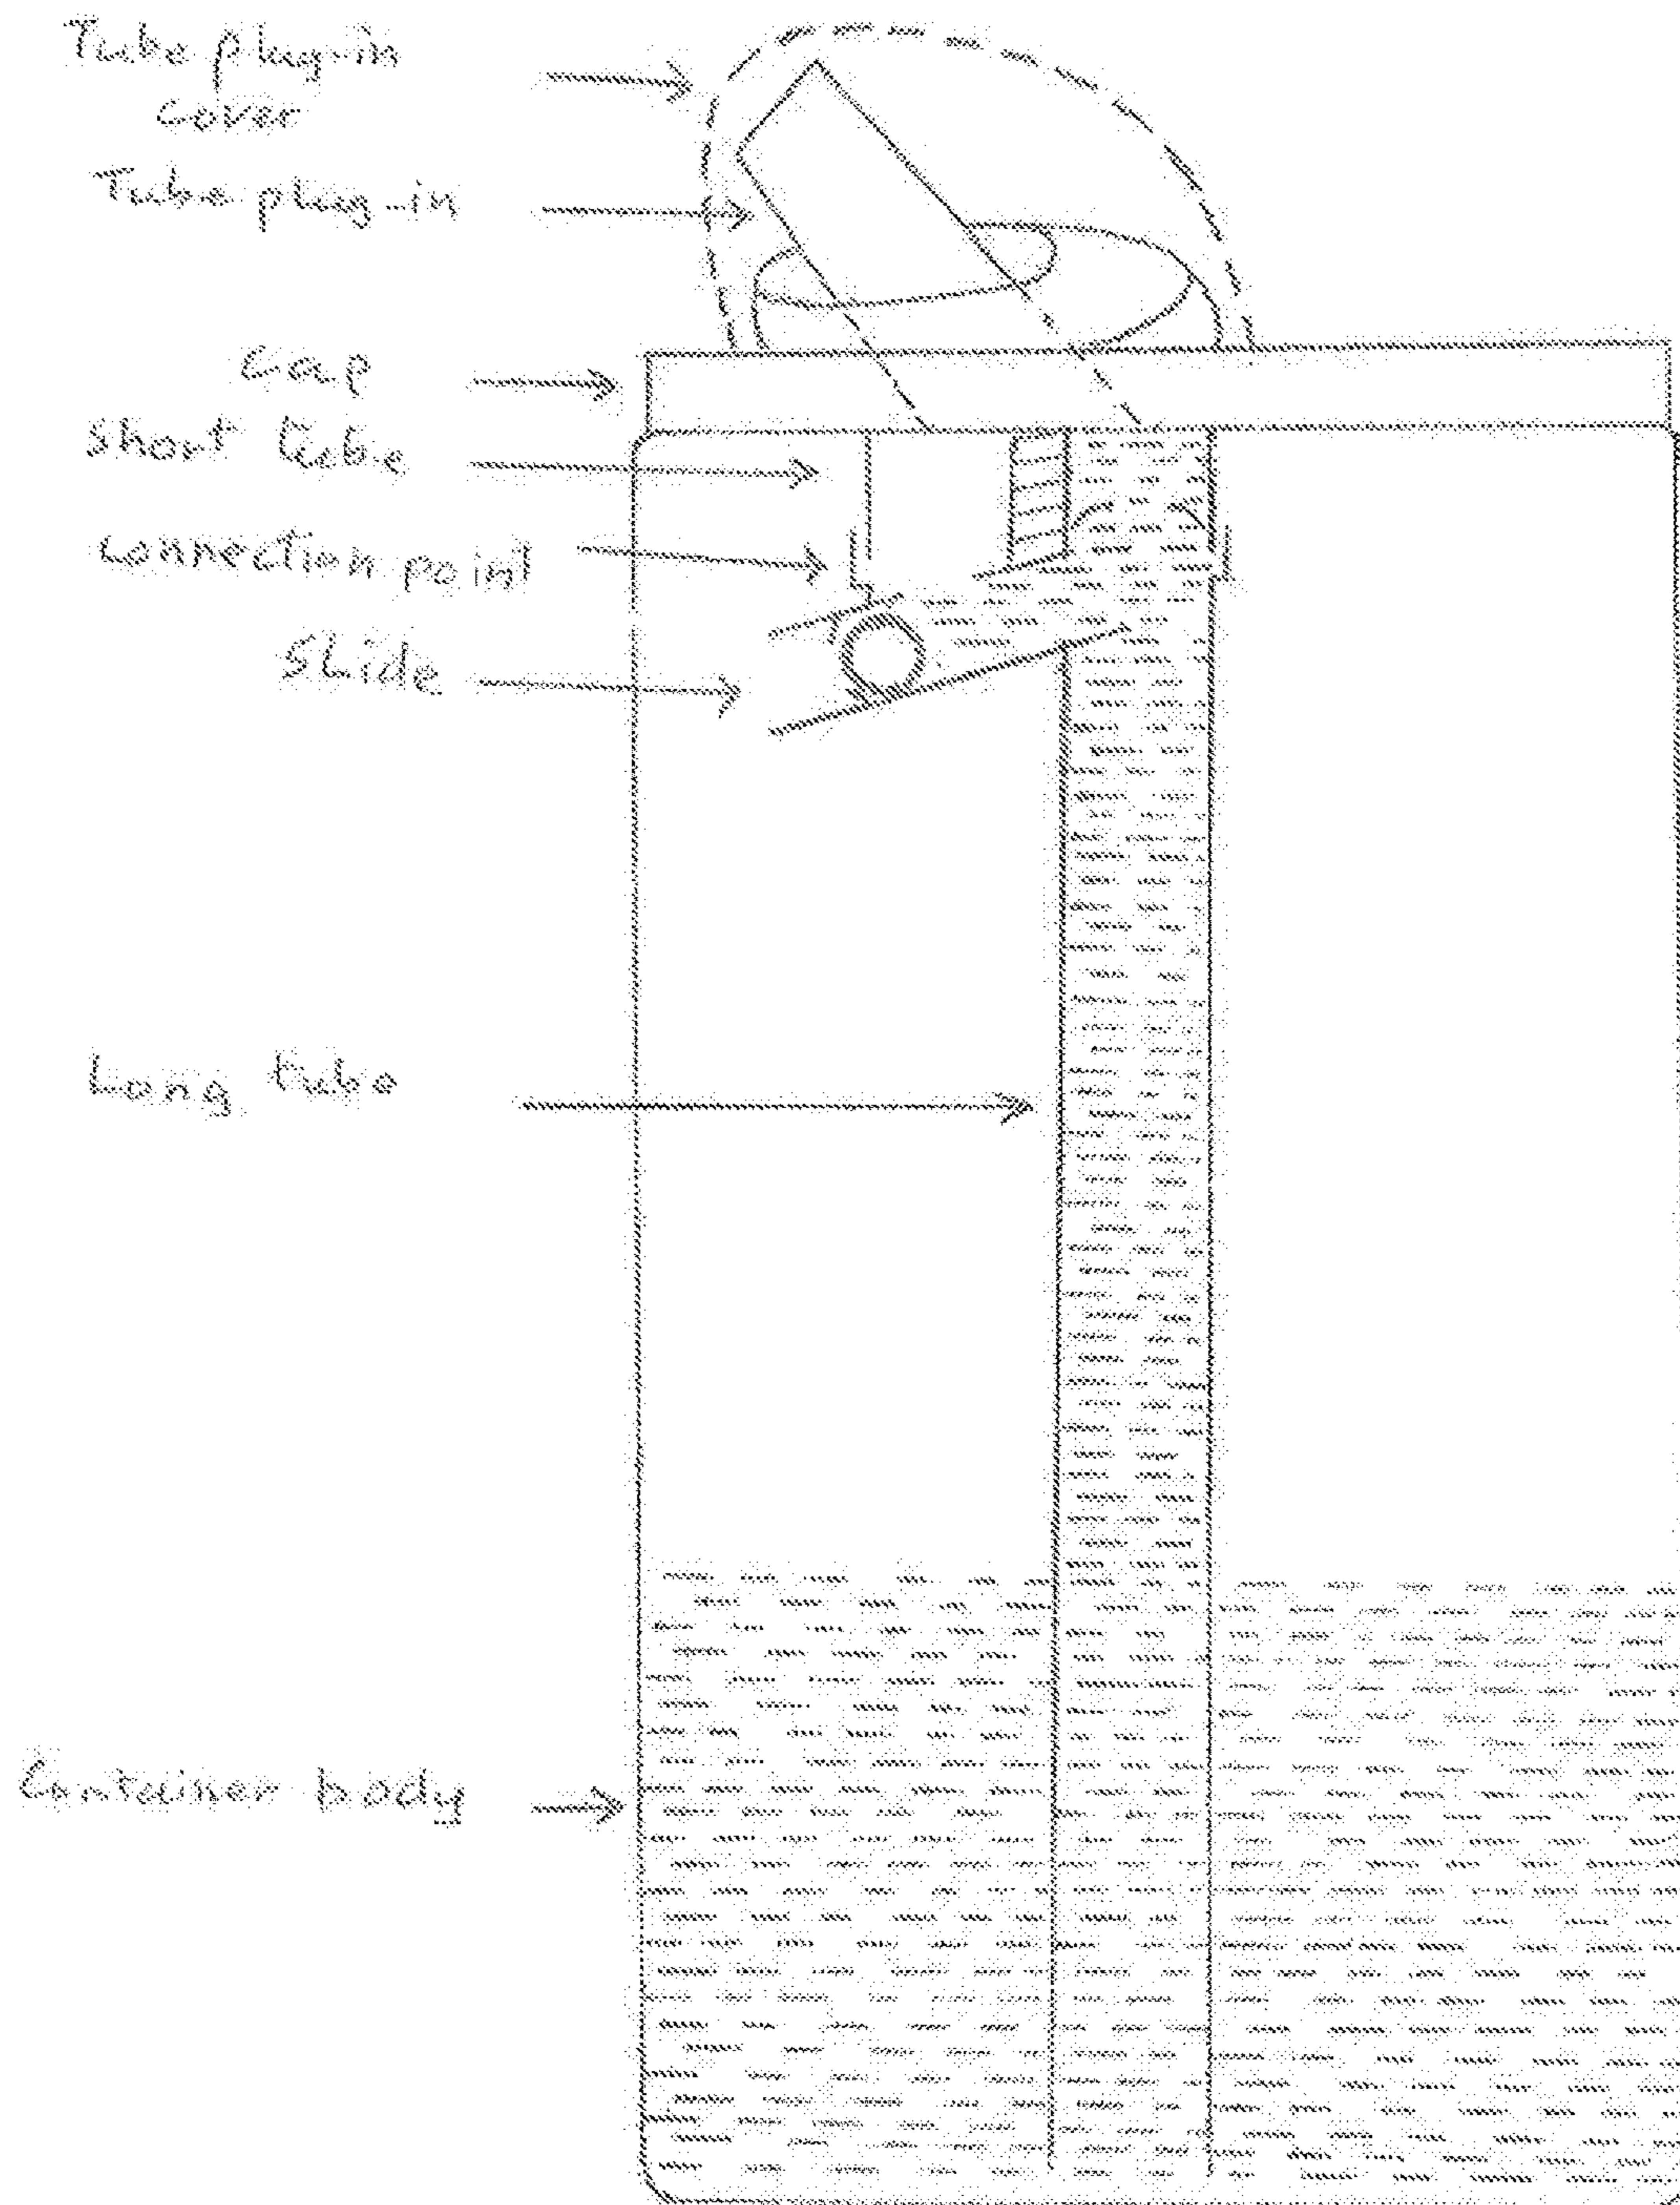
The slide bottom in place of the short tube bottom at sitting position
